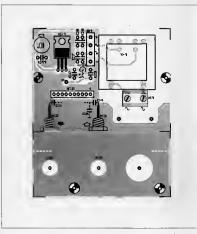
Component mounting plan of the double-sided printed circuit board.
